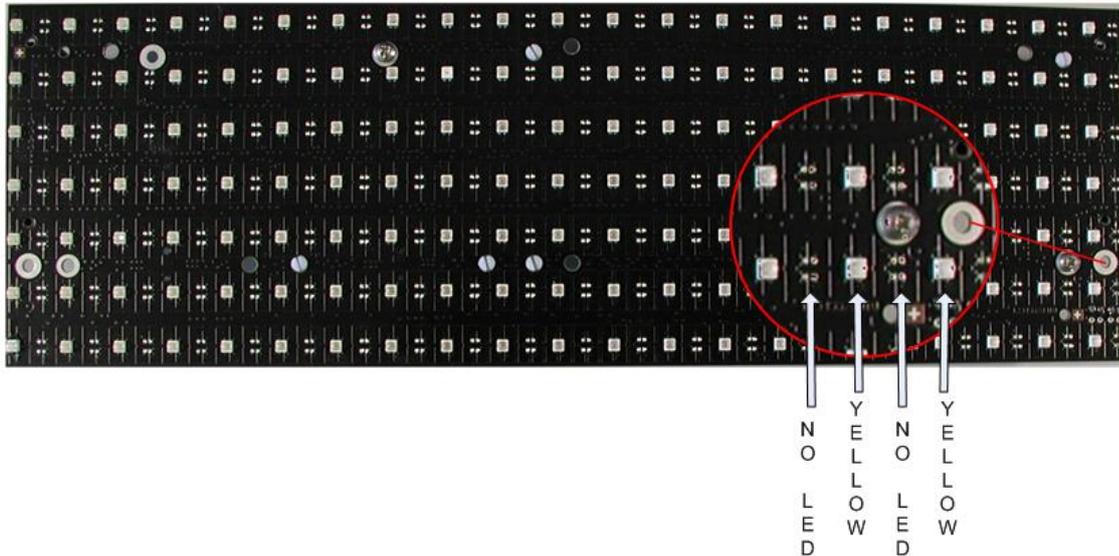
100mm Character PCB Assembly (Yellow) - Viewed from front
